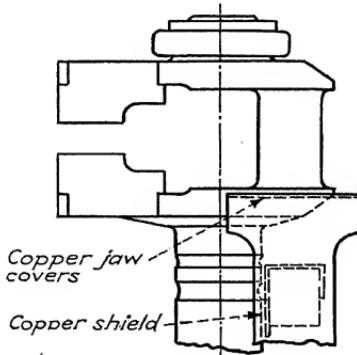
Grip both cheeks in vise like this to install extension shaft.
